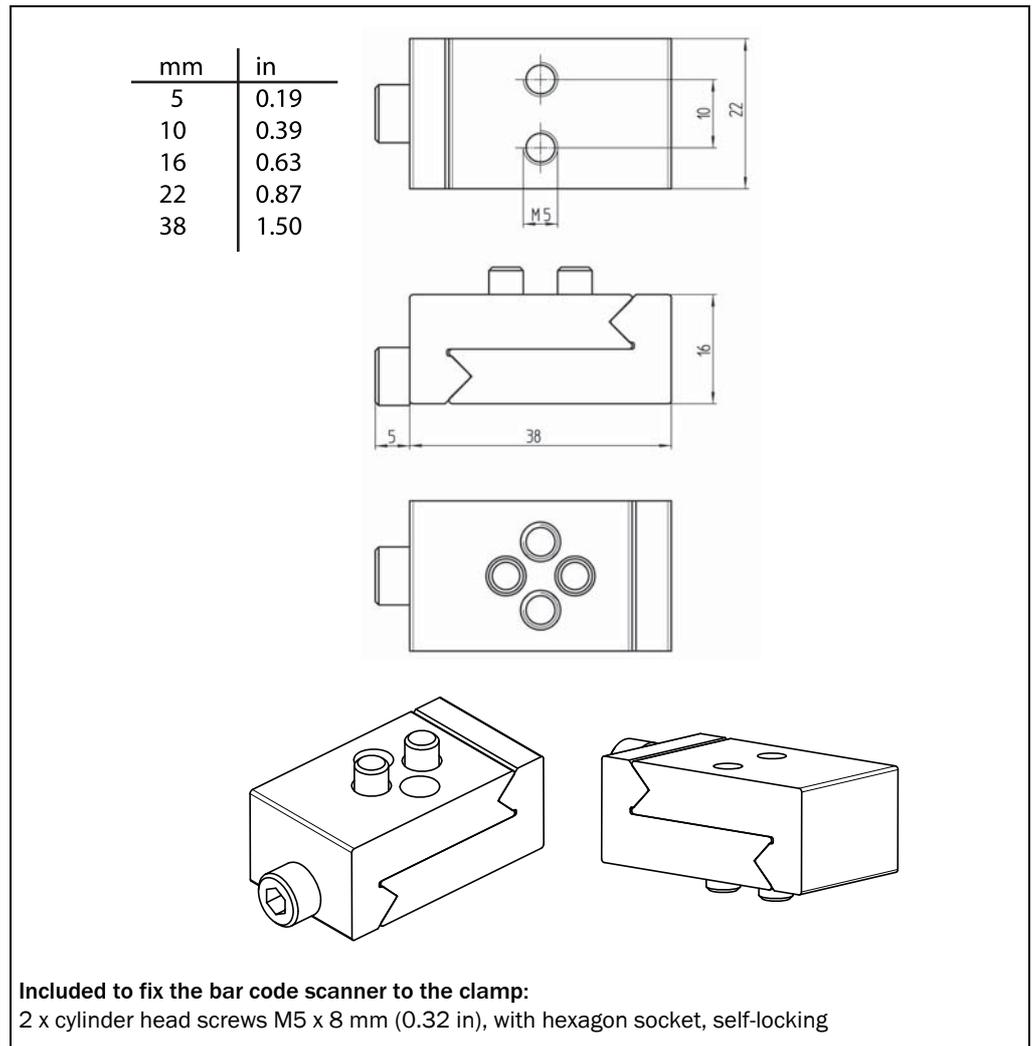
Dimensions of the quick release clamp no. 2025526
